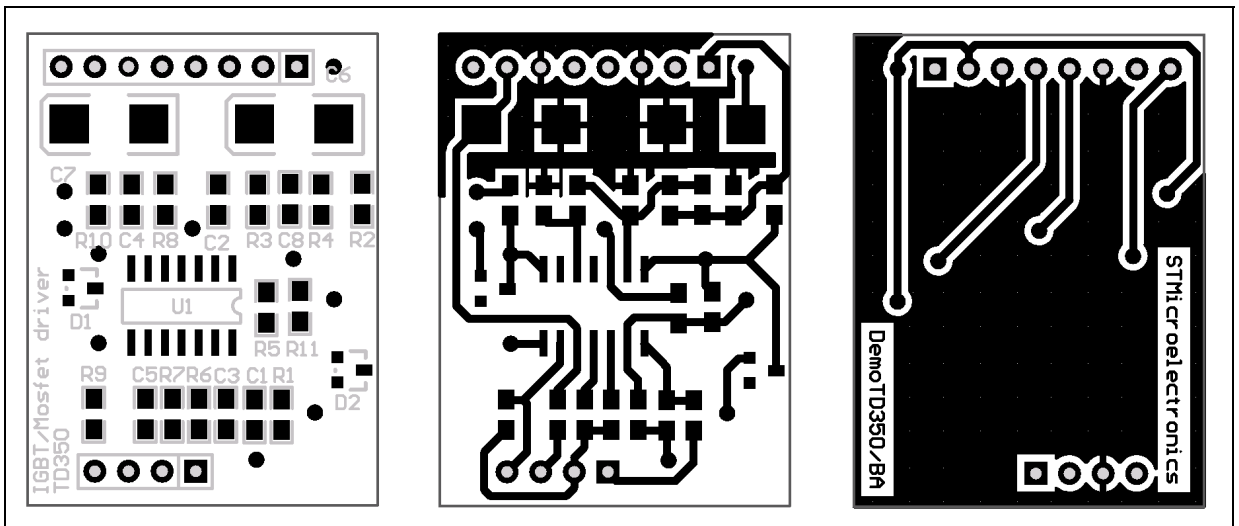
Demoboard PCB: Silk-screen, top-layer and bottom-layer previews
